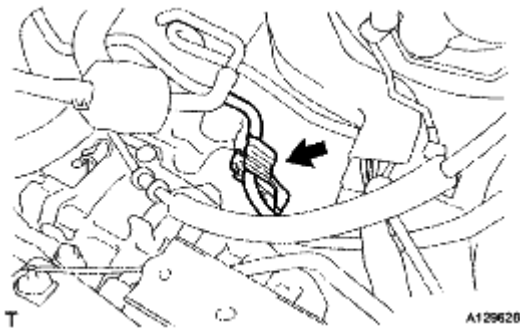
Identifying No. 1 Fuel Pipe Clamp
